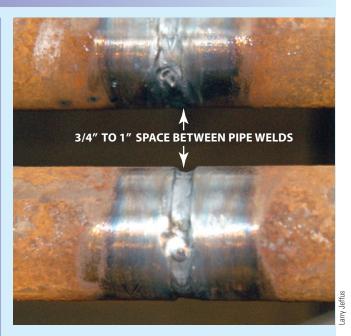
Restricted access during welding can challenge a welder's skills.
